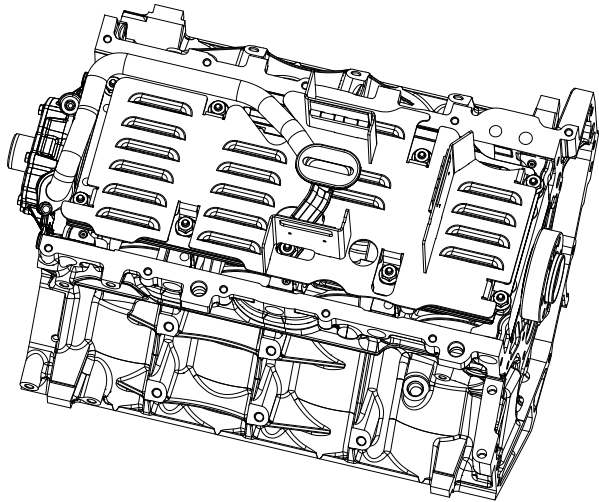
Crank scraper, oil pan baffle and pickup tube shown installed
